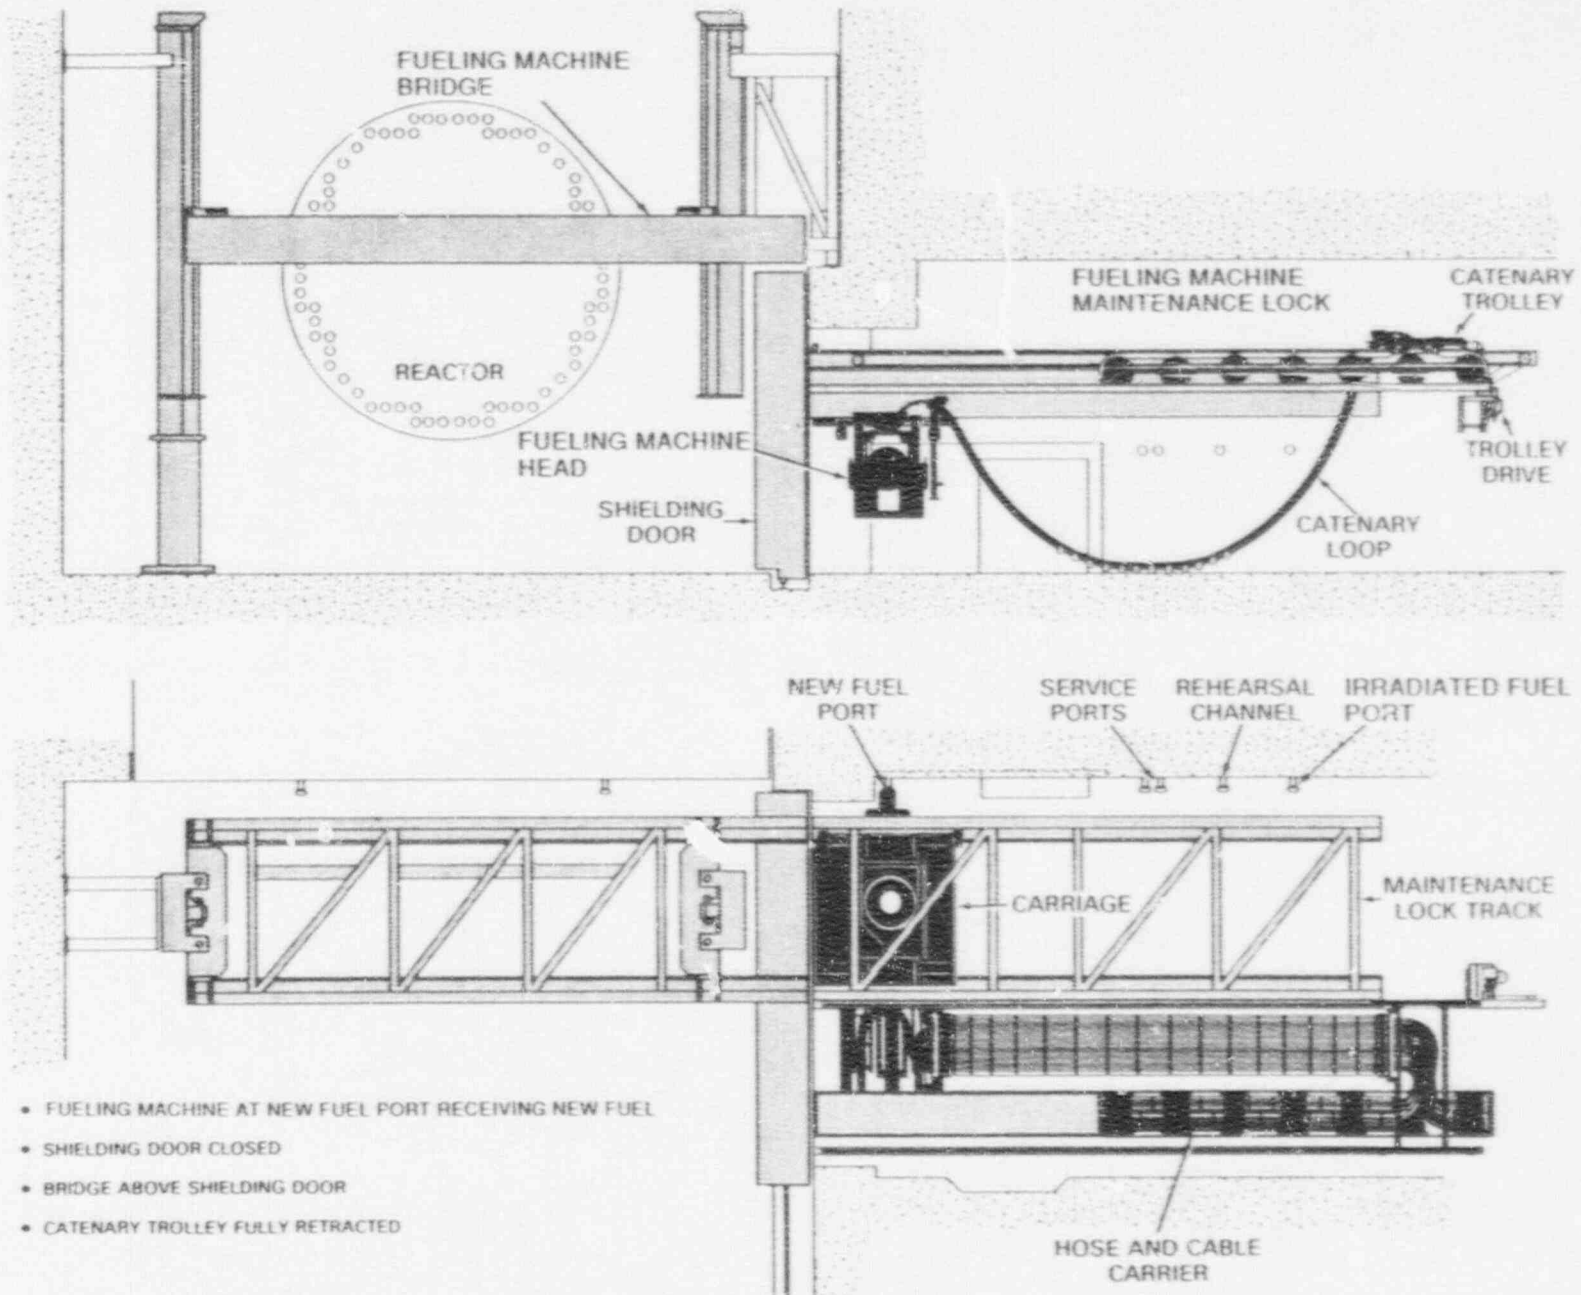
FUELING MACHINE AT NEW FUEL PORT
